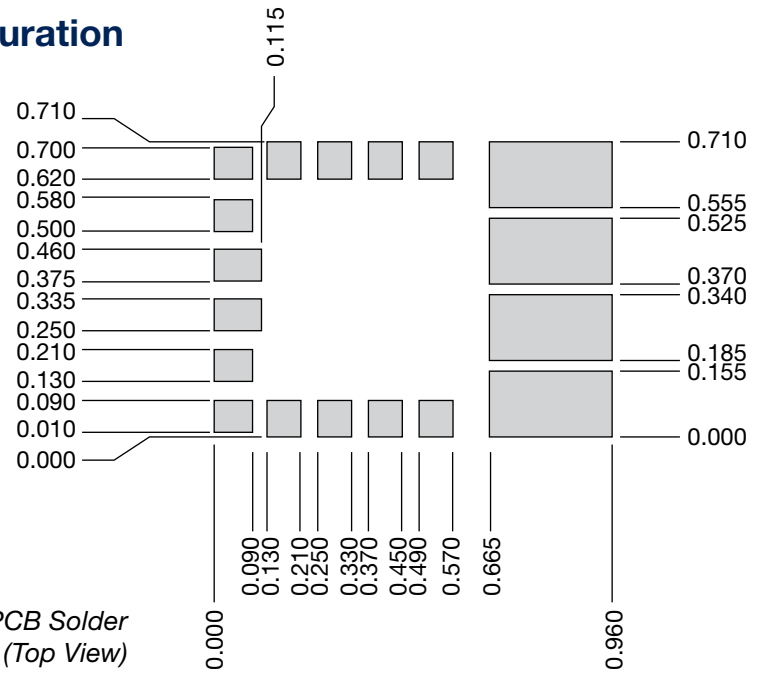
Recommended PCB Solder Pad Configuration (Top View)
